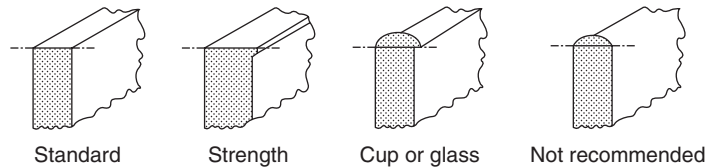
A mismatch is the alignment of two moulded parts (box and cover) usually is traceable to part warpage or differences in shrinkages. The misalignment appears to be improved when a bead or designed mismatch is utilised.
